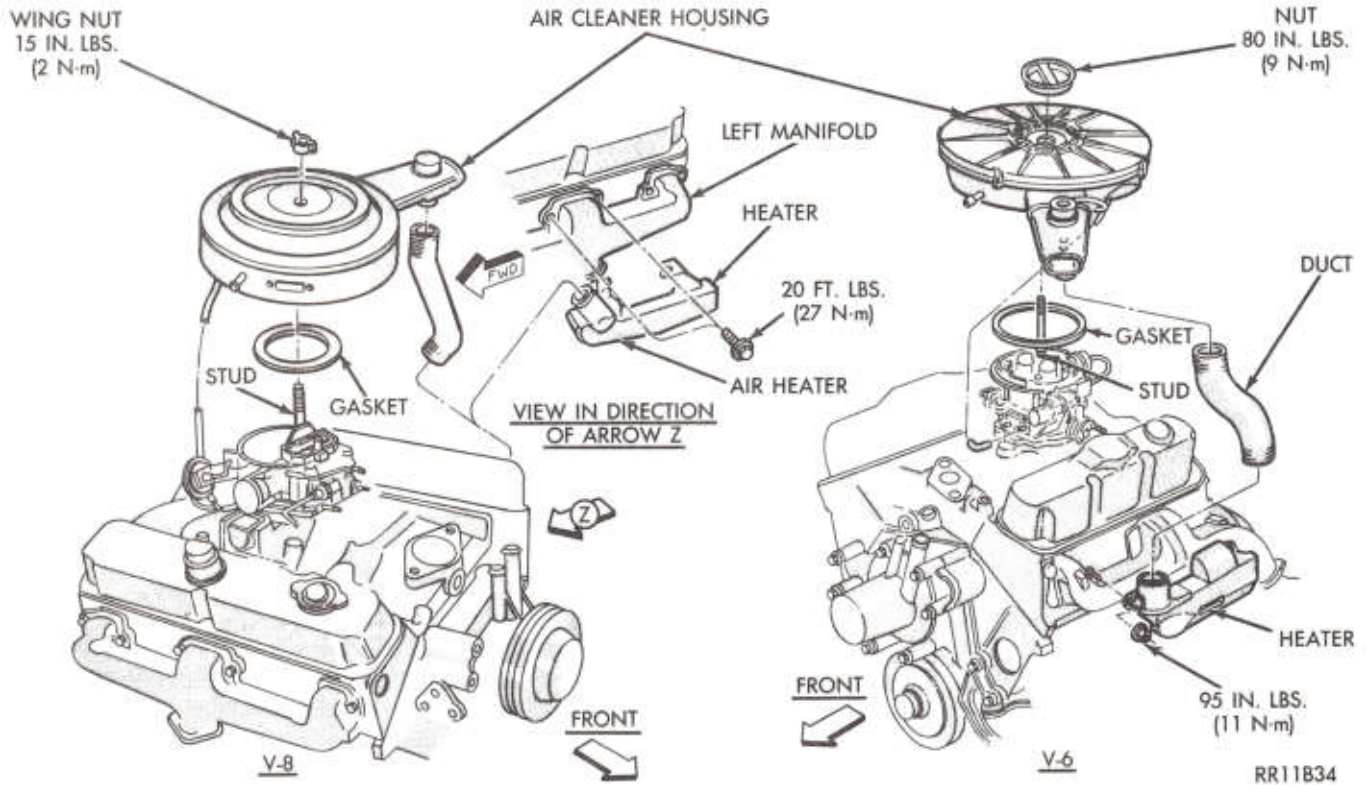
Air Cleaner and Air Heater, V6 and V8 Engines
